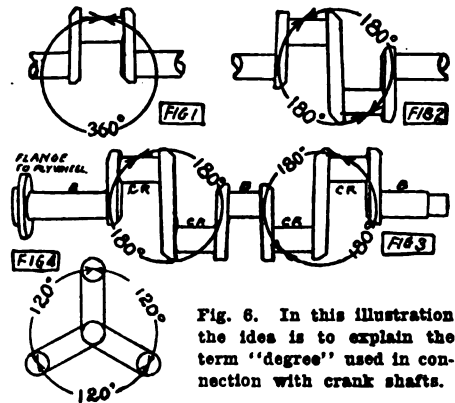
In this illustration the idea is to explain the term "degree" used in connection with crank shafts.
